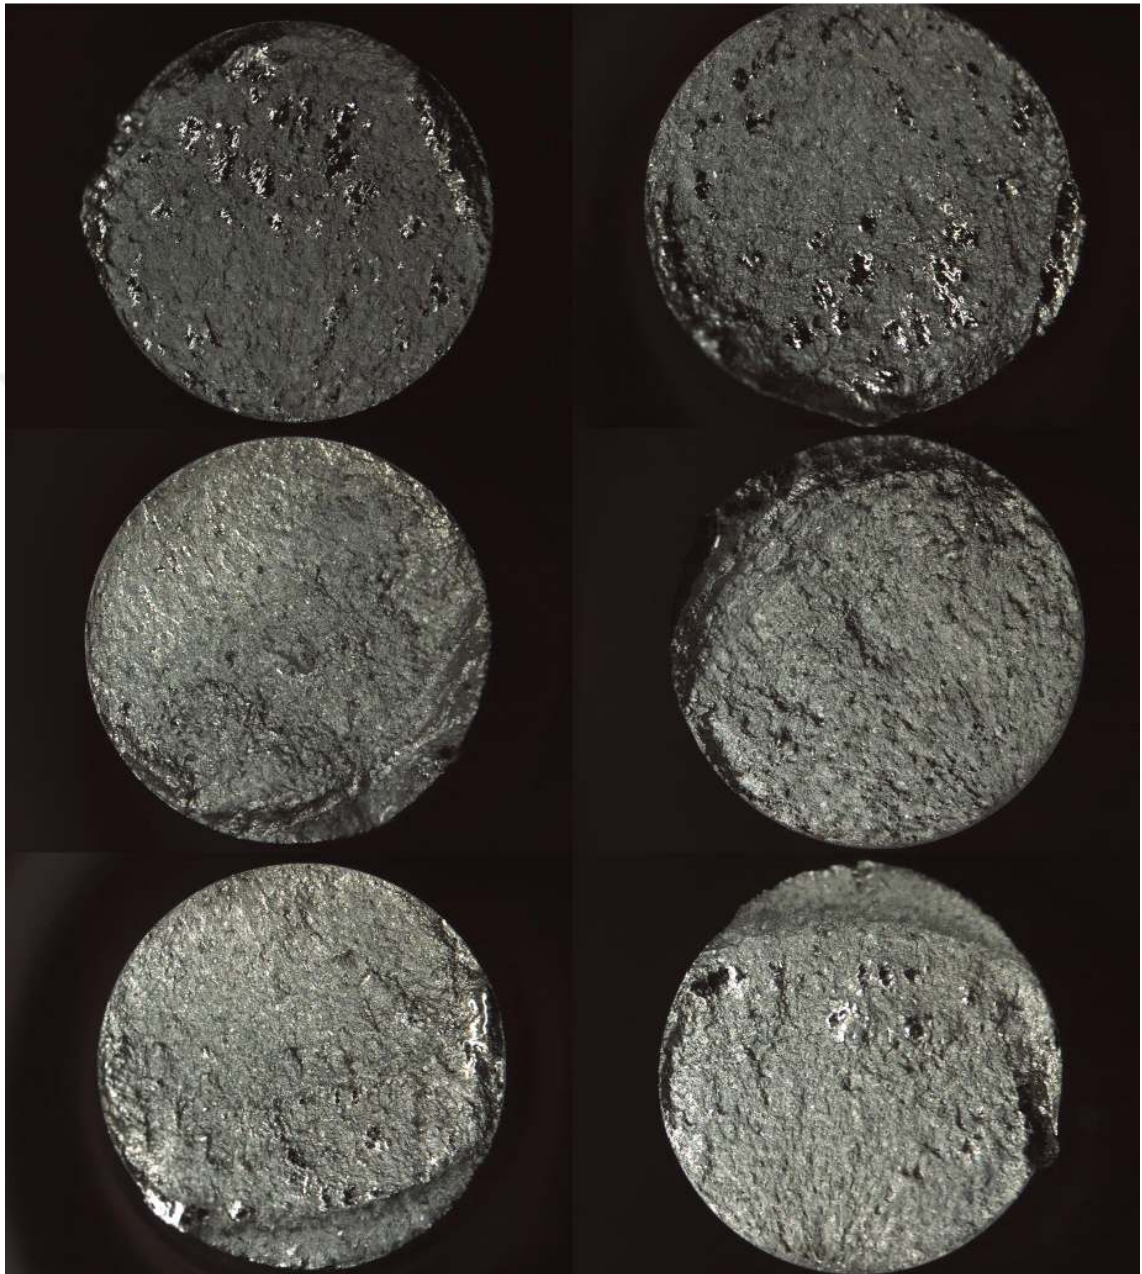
Z direction alfa case fatigue specimens fracture surfaces
